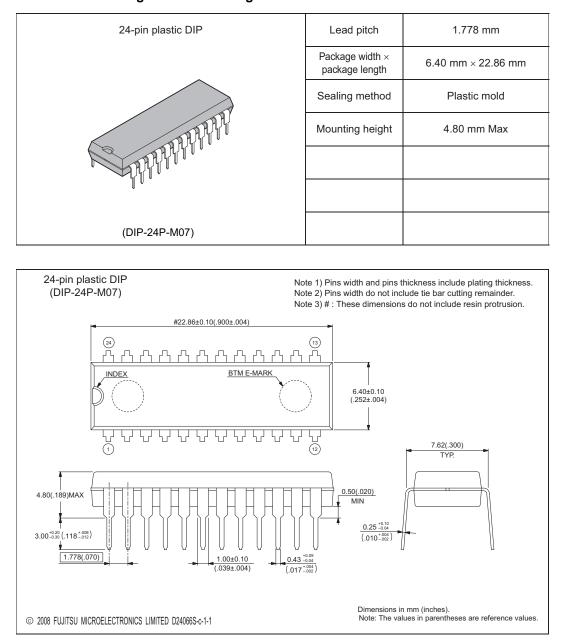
Package Dimensions of DIP-24P-M07
